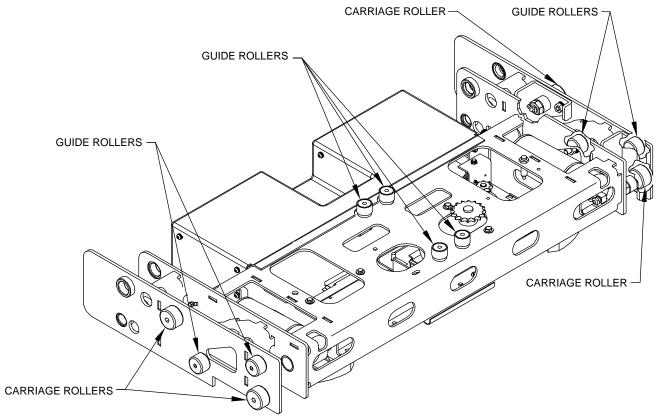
CARRIAGE ROLLERS AND GUIDE ROLLERS (grease fittings indicated with arrows)
